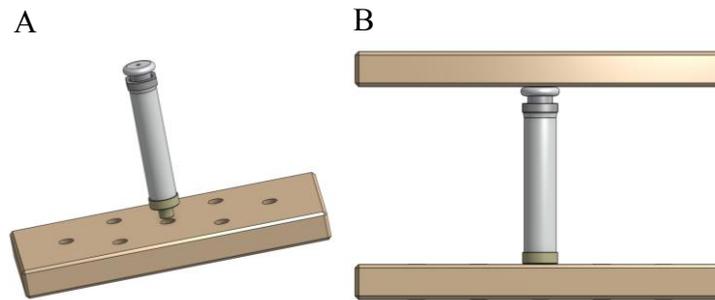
(A) The re-glued syringe was inserted into a hole on the bottom place of a custom-made clamping block.
